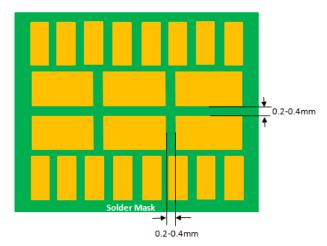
PCB Exposed Pad Land Pattern Segmented by Solder Mask
